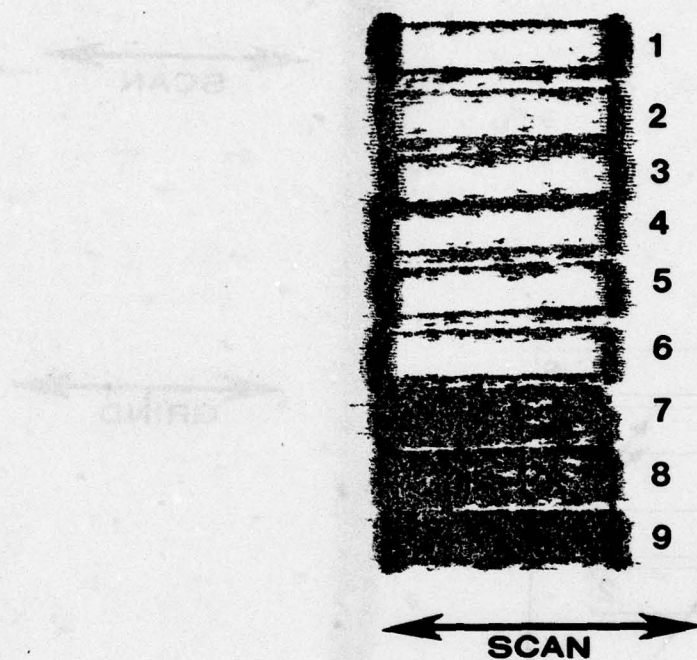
C-scan Recording of 45 MHz, 18° Surface Wave Inspection of Tensile Surfaces of NC-132 HPSN Four-Point-Bend Specimens.
